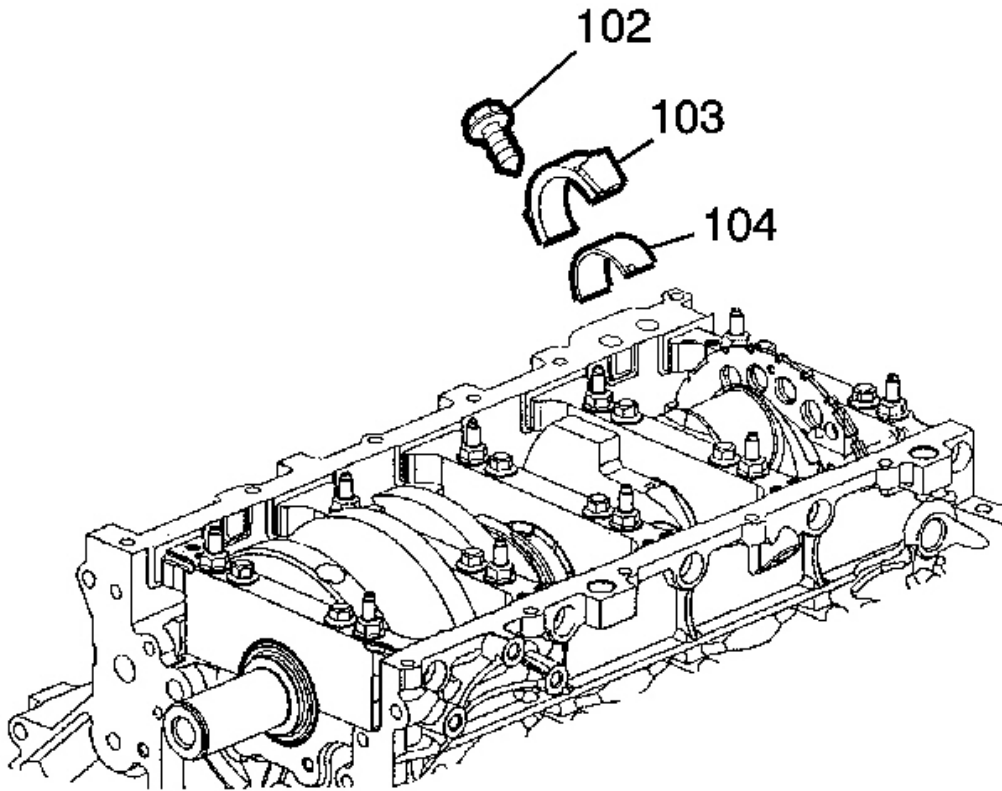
View Of Connecting Rod Bolt, Cap & Bearing
